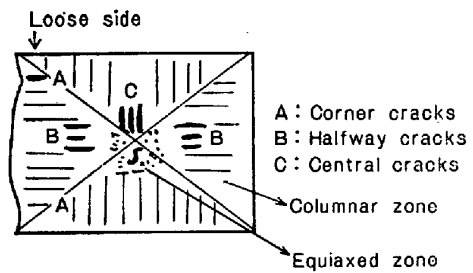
Schematic internal cracks of casting bloom.
